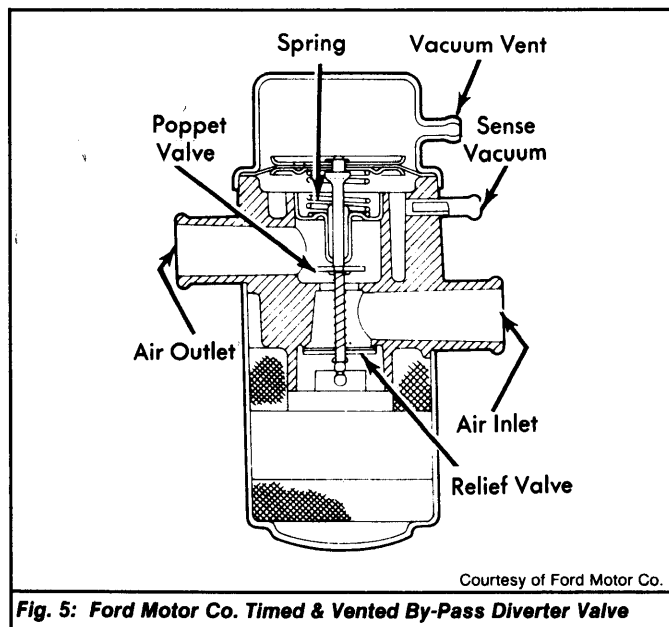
Ford Motor Co. Timed & Vented By-Pass Diverter Valve
